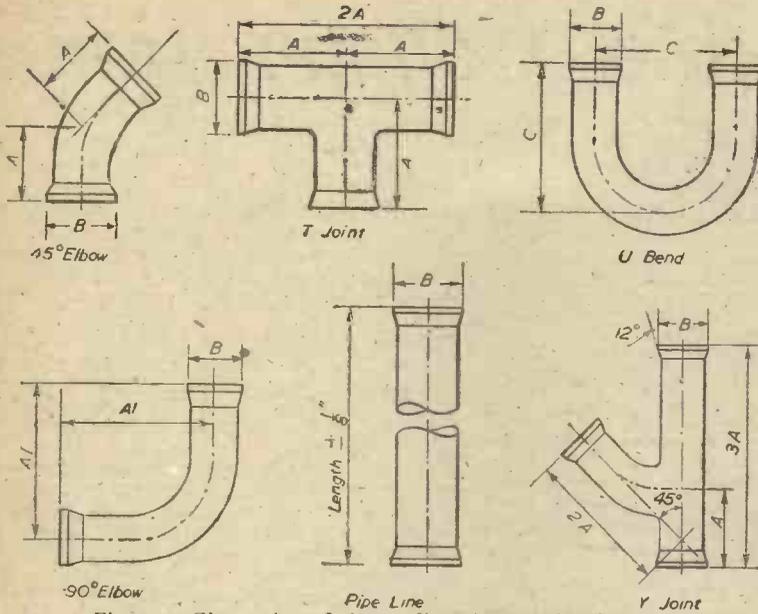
Glass pipe fittings, dimensions and tolerances.
